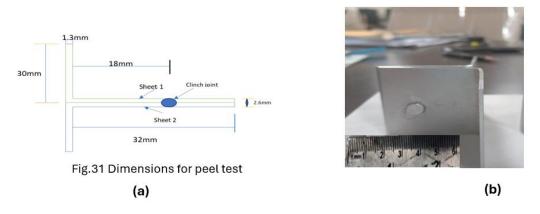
a ) Schematic of joining two AA 1050 sheet by mechanical clinching b) sample for peel test
